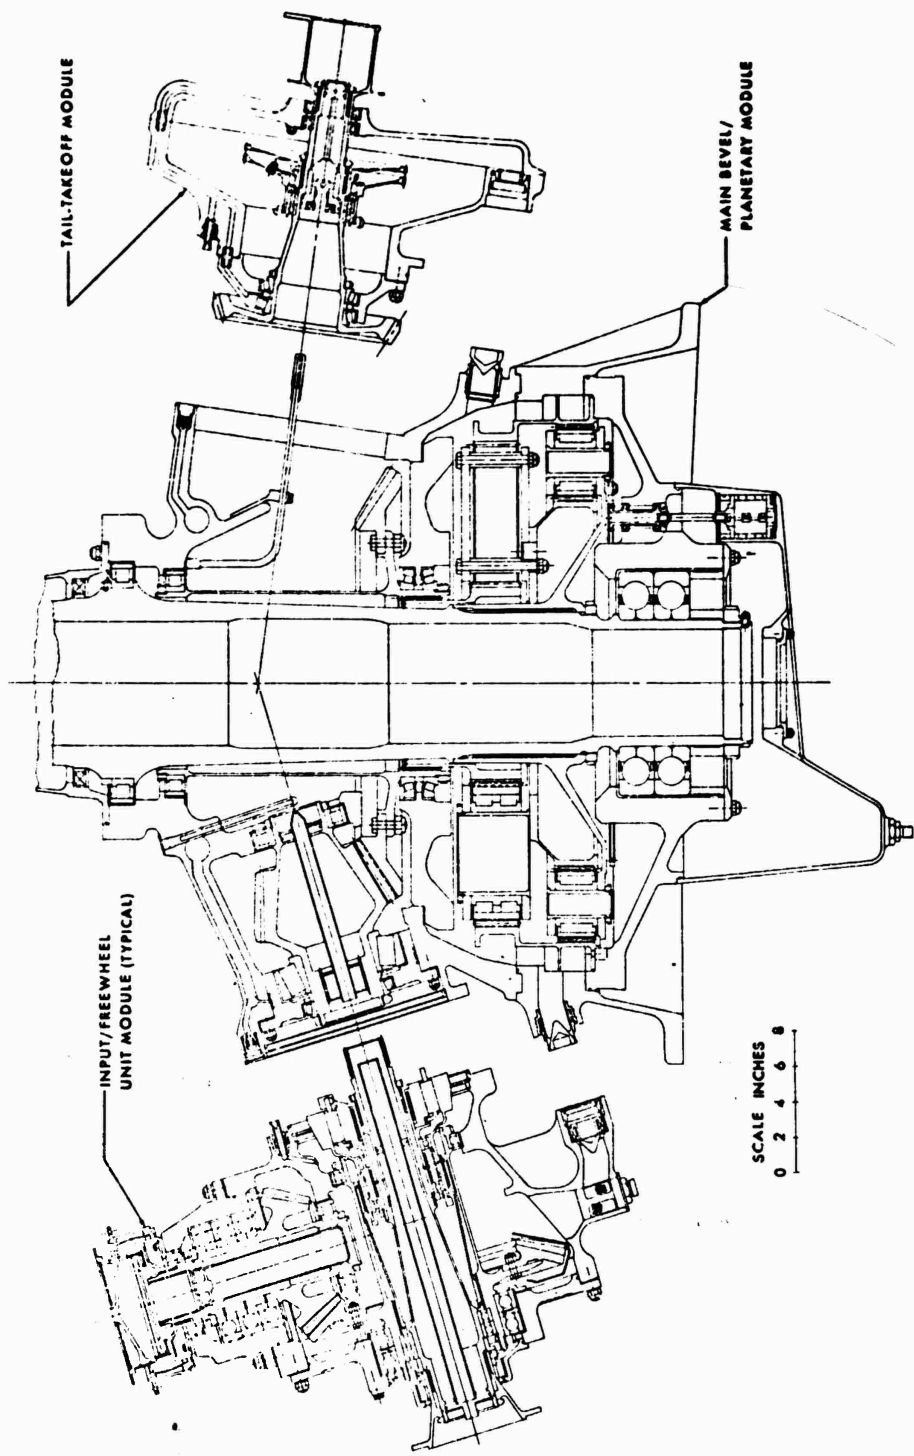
Exploded Cross Section of CH-54B Main Transmission, Four-Module Configuration.
